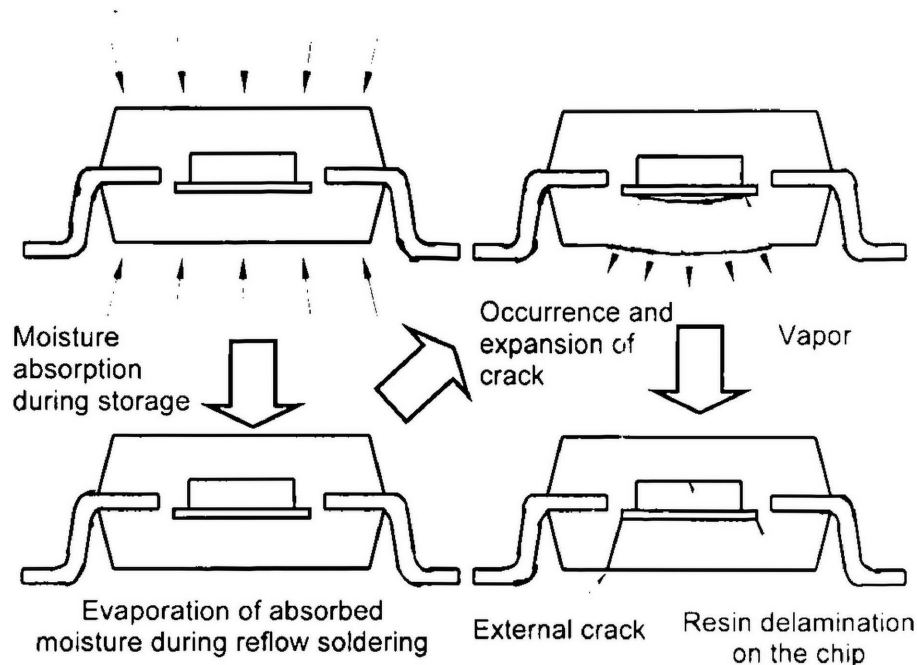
Cracking mechanism during reflow soldering
